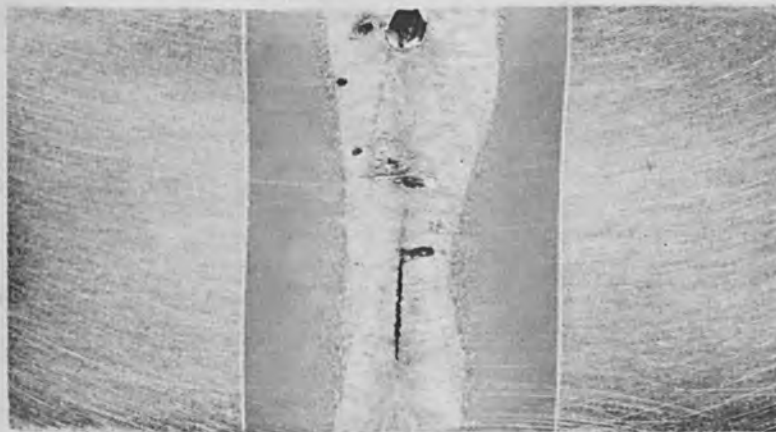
Macrostructure of Non-Vacuum Electron Beam Weld Made in 1/2 Inch HP 9Ni-4Co Steel (2% Nital Etch). Weld Parameters - 175 kV, 70 mA, 20 ipm.
